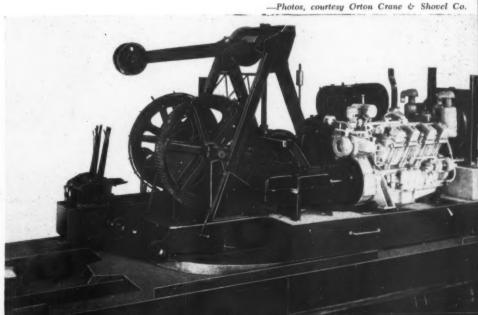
Right—Operating machinery of crane in Fig. 104. Power shafting is SAE 4140, gears are 4145, toggle, sheave and other large size high-wearing pins are 4615 cased; oil quenched, tempered
